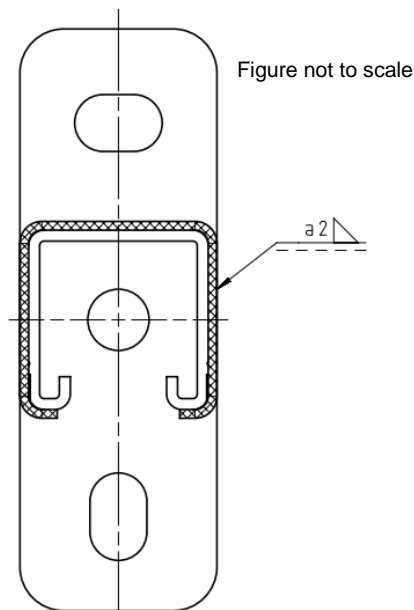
Welded connection of FCA 41/2,5
